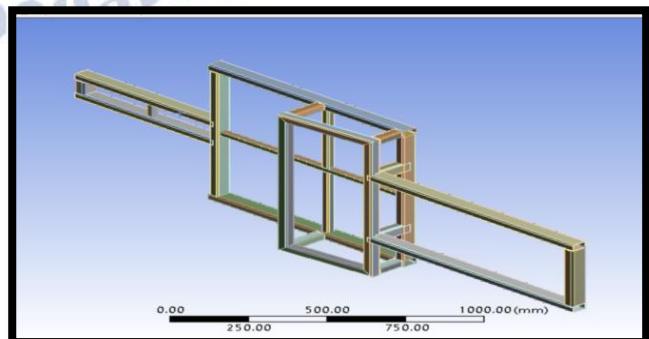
GEOMETRIC VIEW OF 3D MODEL IN CAD
